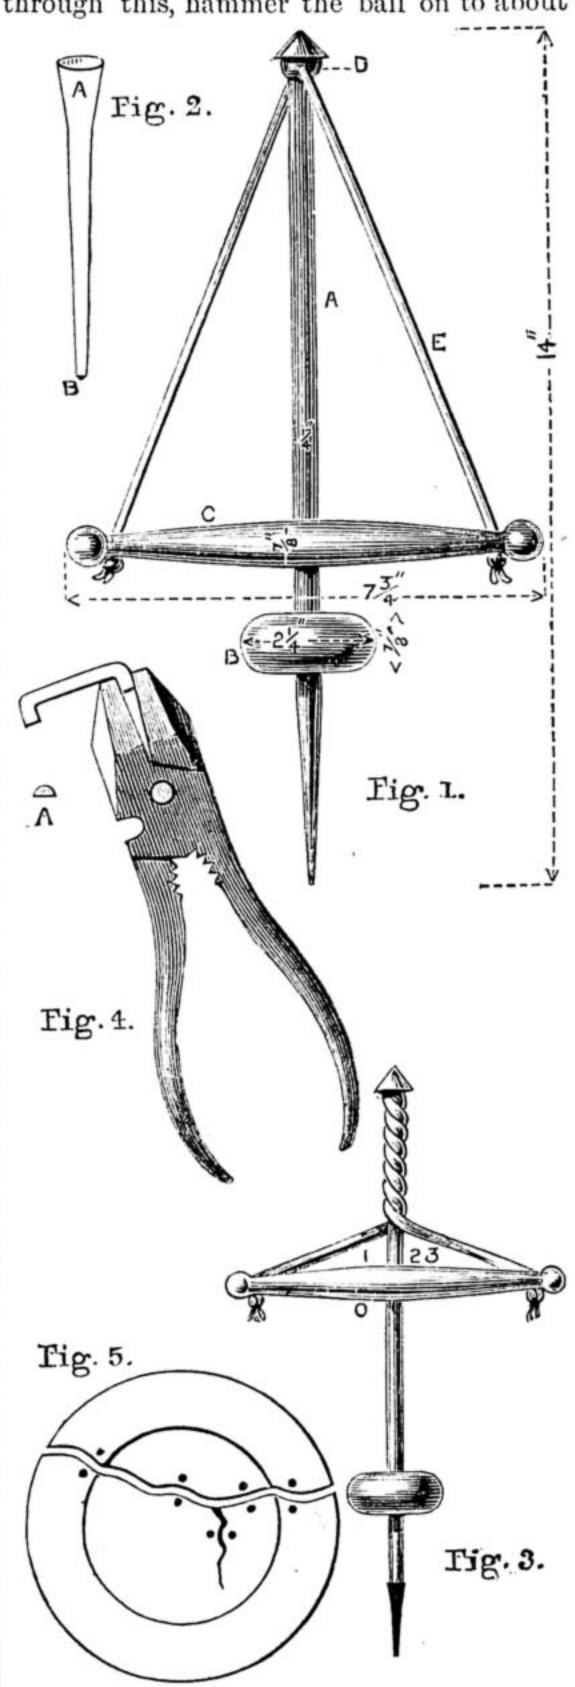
Drill for China and Glass Riveting, showing Dimensions. Fig. 2.—Diamond Drill Bit. Fig. 3.—Drill wound up to commence Drilling. Fig. 4.—Nippers for bending Wire. Fig. 5.— Plate drilled for Riveting.
